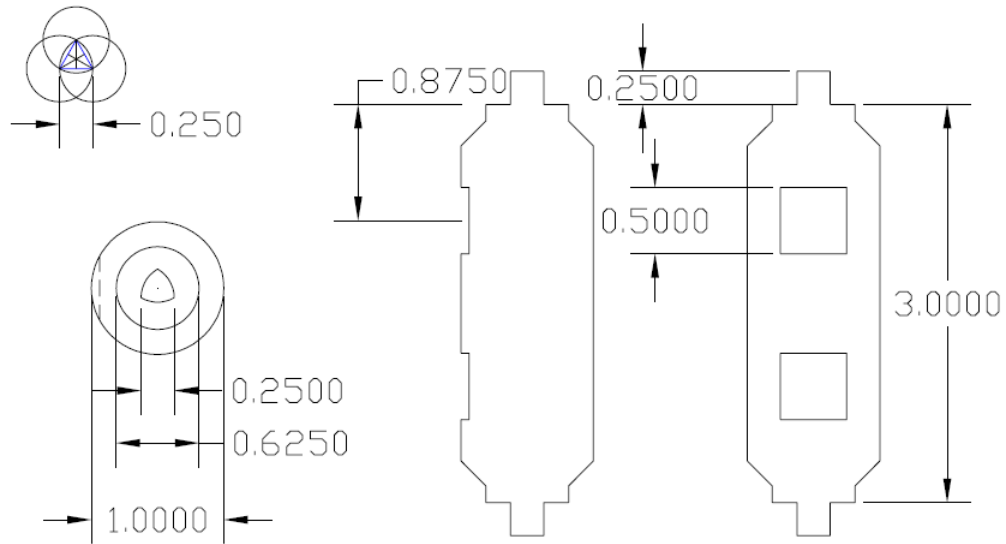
The Trivex Tool CAD Design. For welding the pin length was ground down to .237”
